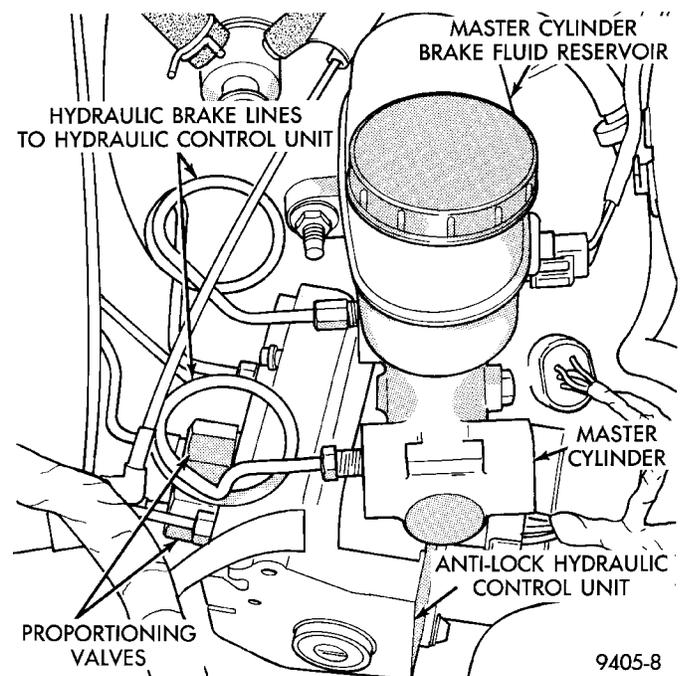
Master Cylinder For Anti-Lock Brake Equipped Vehicles
